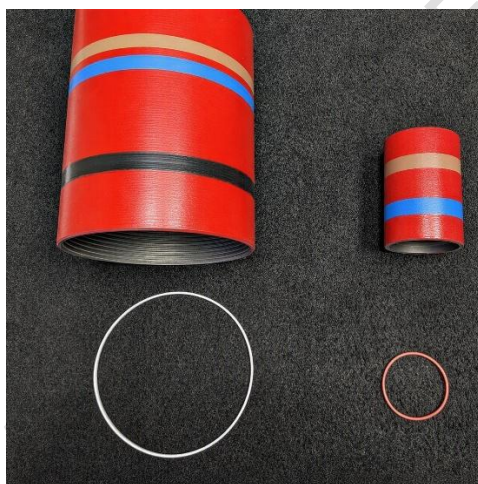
7 in. BC and 2 7/8 in. EUE SR couplings and Seal Rings
